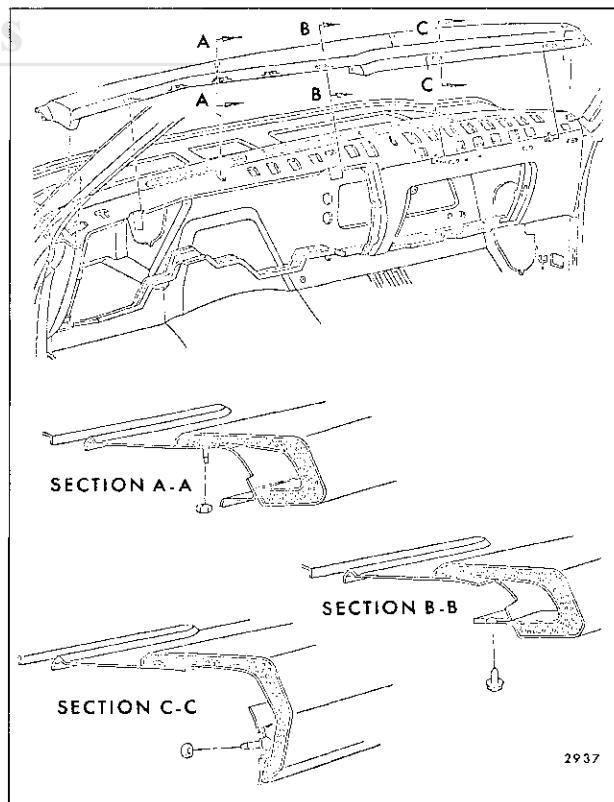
Instrument Panel Cover - Chevrolet "A" Styles
